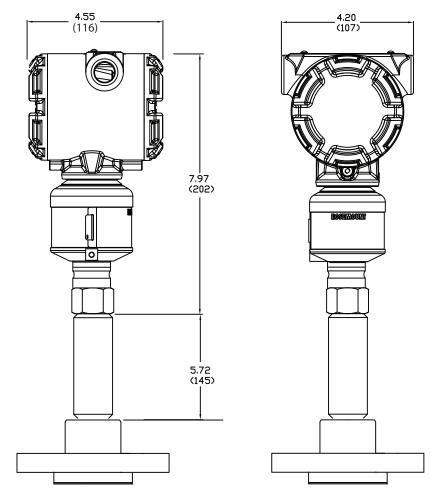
Thermal Optimizer (D5) with FFW (Measurement in inches (millimeters))
